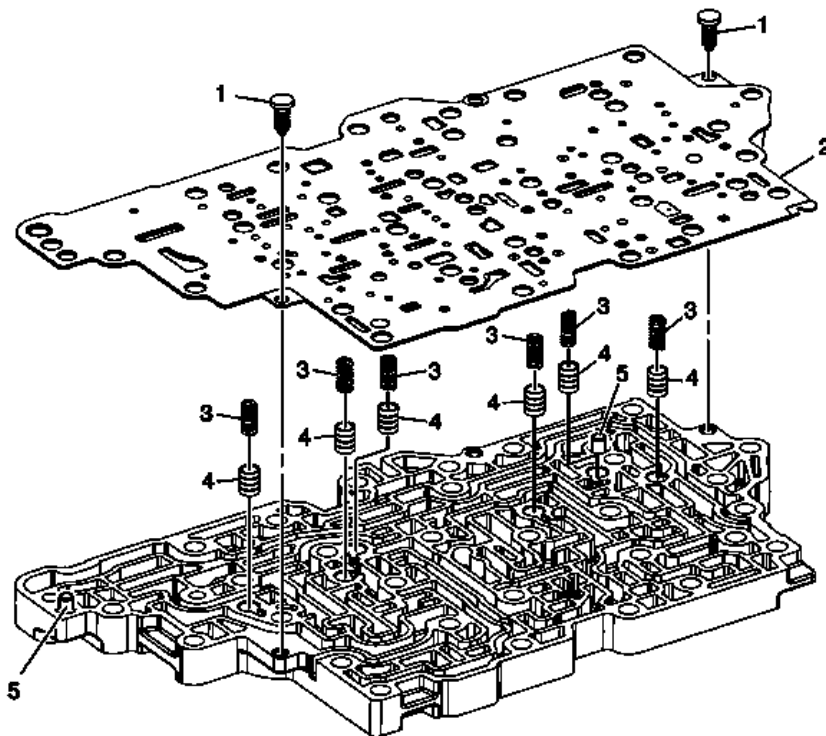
Control Valve Channel Plate Cleaning and Inspection
